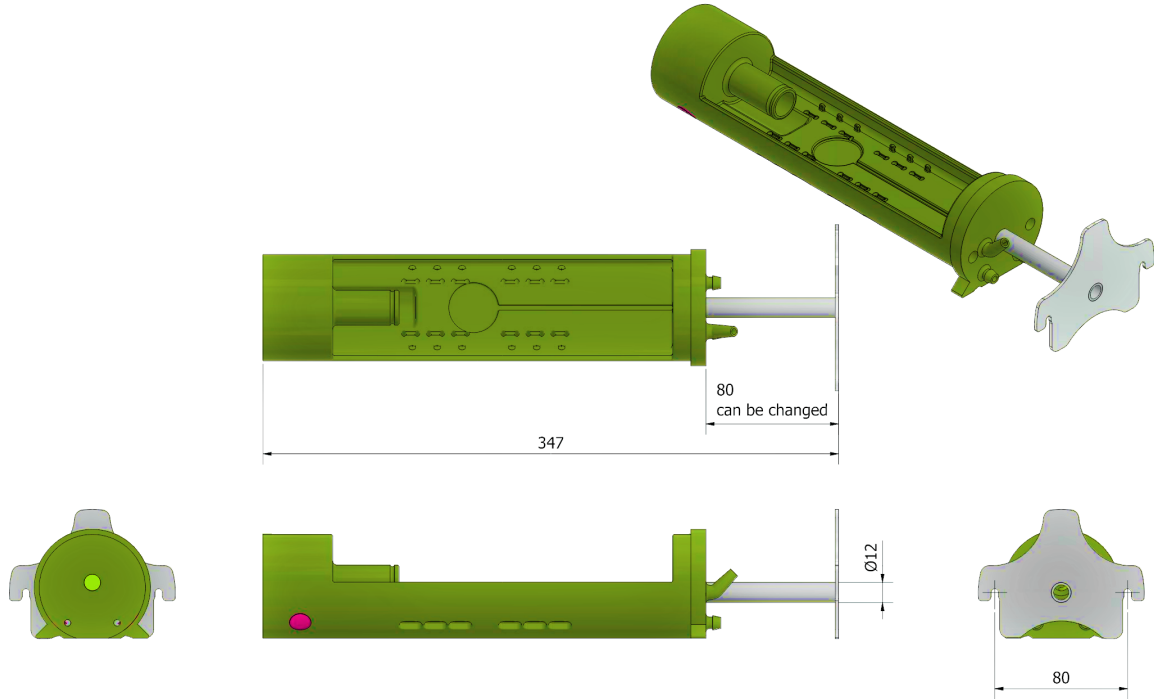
The version 2 holder and its mounting plate for the scanner.
